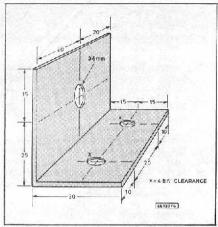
Dimensions of the aluminium mounting bracket for the mains suppressor SP1.
